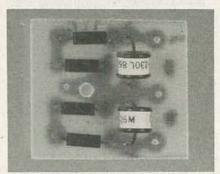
MODEM/FAX PROTECTOR circuit board assembly shown actual size.
